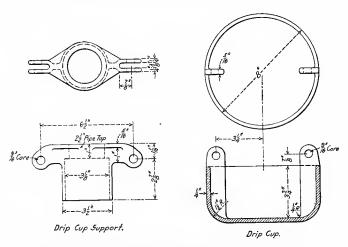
Drip Cup and Support for Central of New Jersey Ice Car Shown in Figs. 377 and 379.
